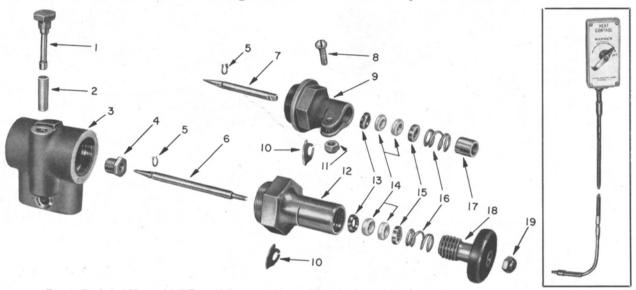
Exploded View of 947 Type Valves and View of Remote Control Mechanism
